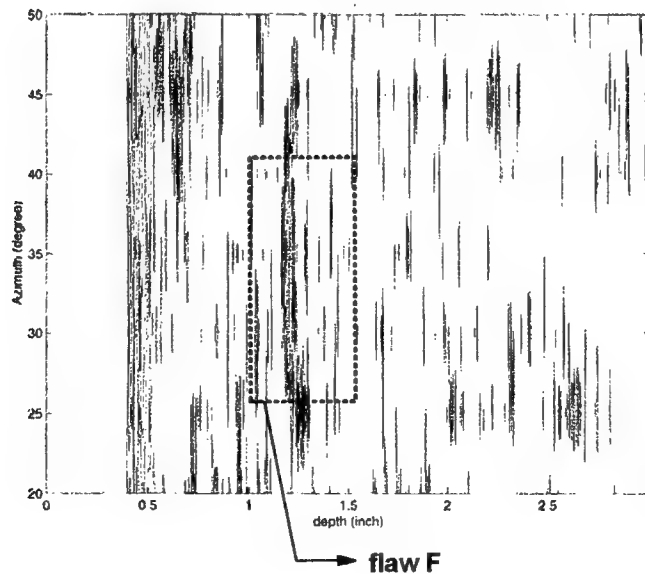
SAMPLE ULTRASONIC SCAN PERFORMED ON THE RMI BILLETS AND USED TO LOCATE DEFECTS
